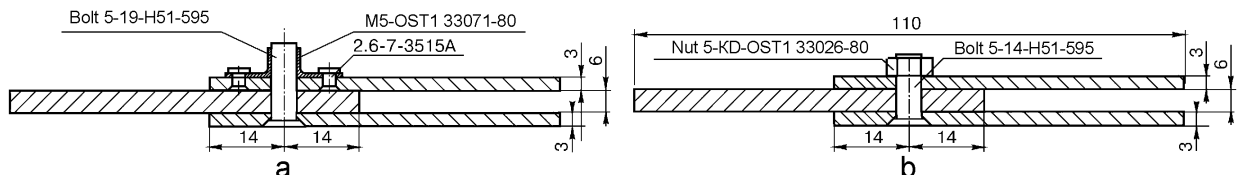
Doubleshear Single Row Countersunk Detachable Bolted Joint Test-Piece:
